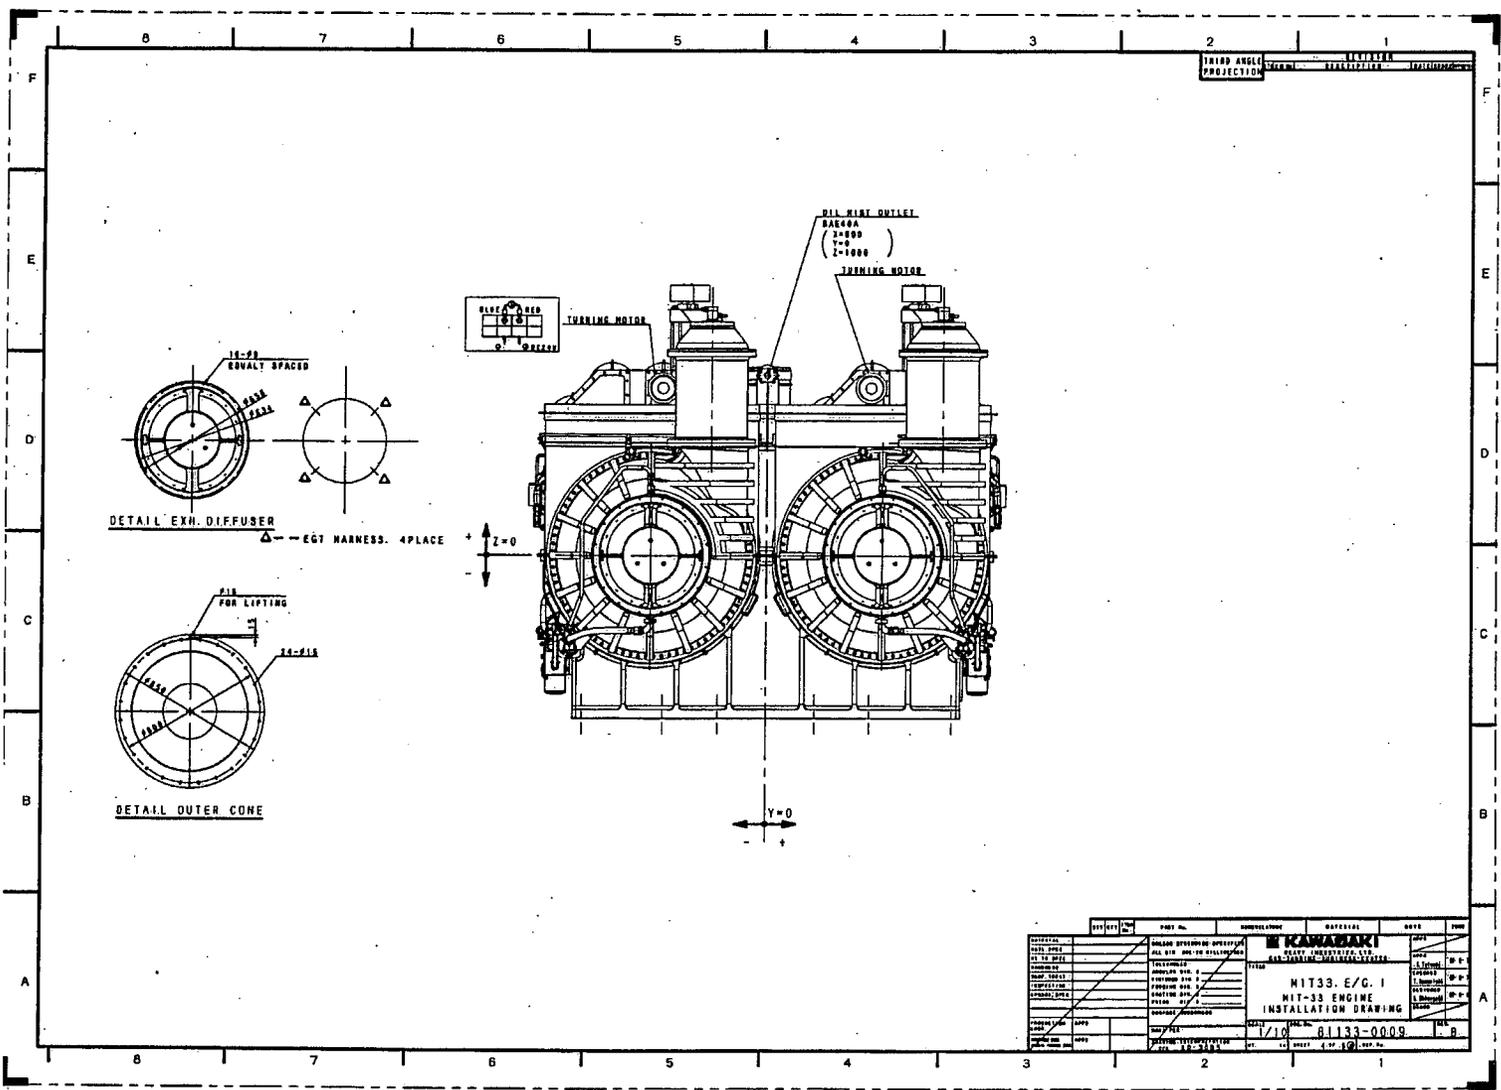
Installation Drawing of Gas Turbine Assembly (sheet 4)
